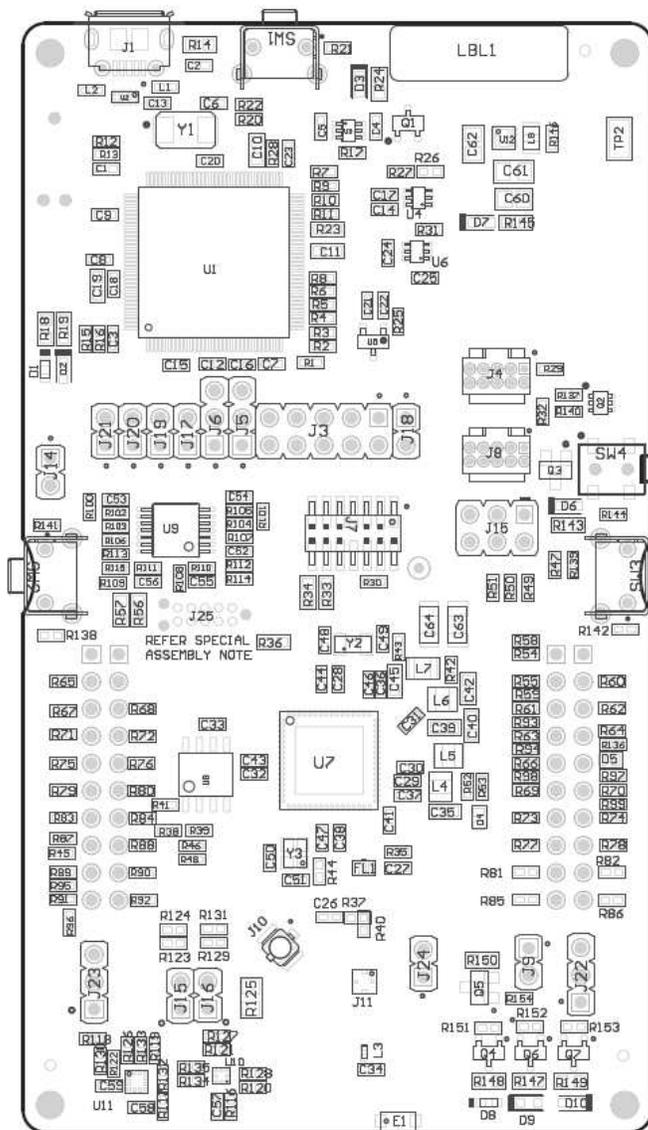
CC3220x LaunchPad Top-Layer Assembly Drawing
